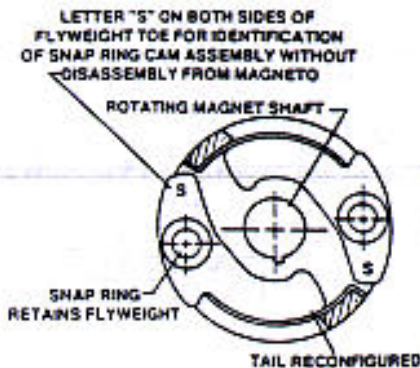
SNAP-RING CAM ASSEMBLY IDENTIFICATION
